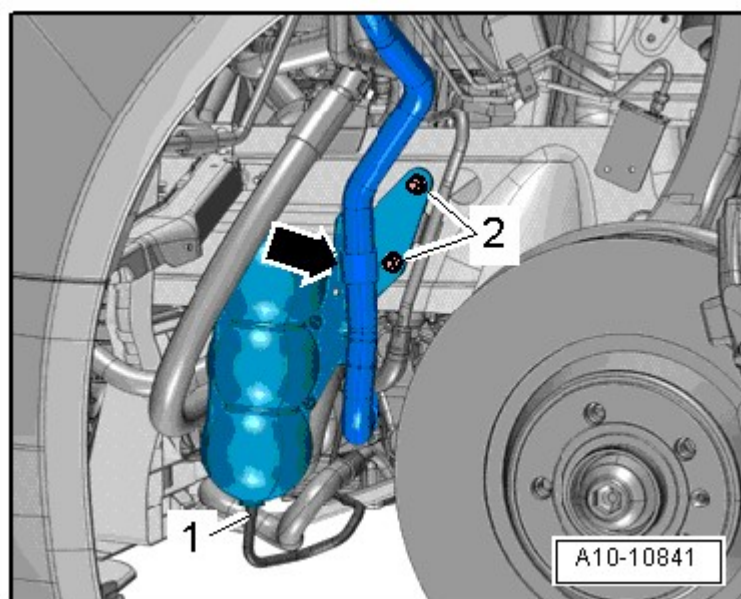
Disconnecting Vacuum Hose And Lay Hydraulic Oil Hose To Side
